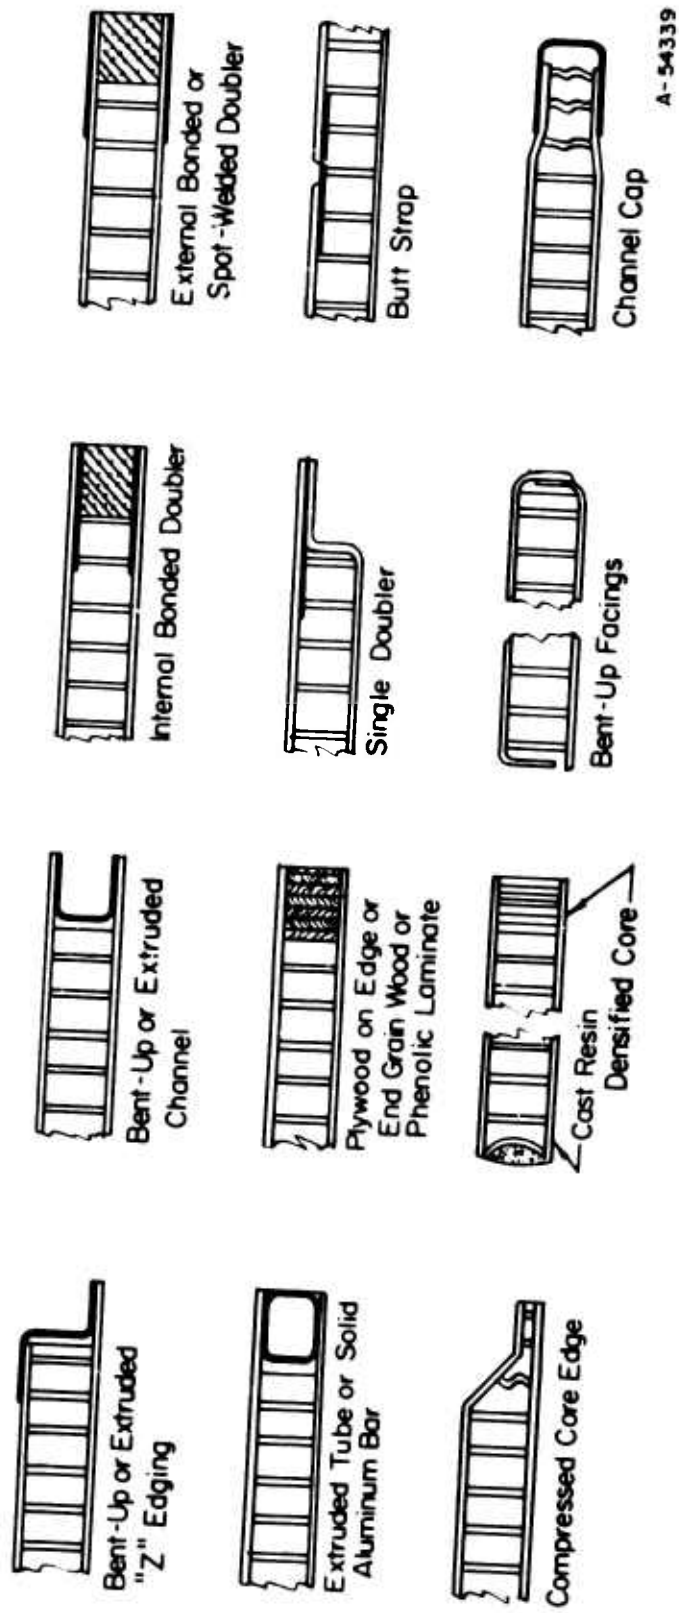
SOME DESIGNS FOR PANEL EDGE JOINTS (Ref. 45)
